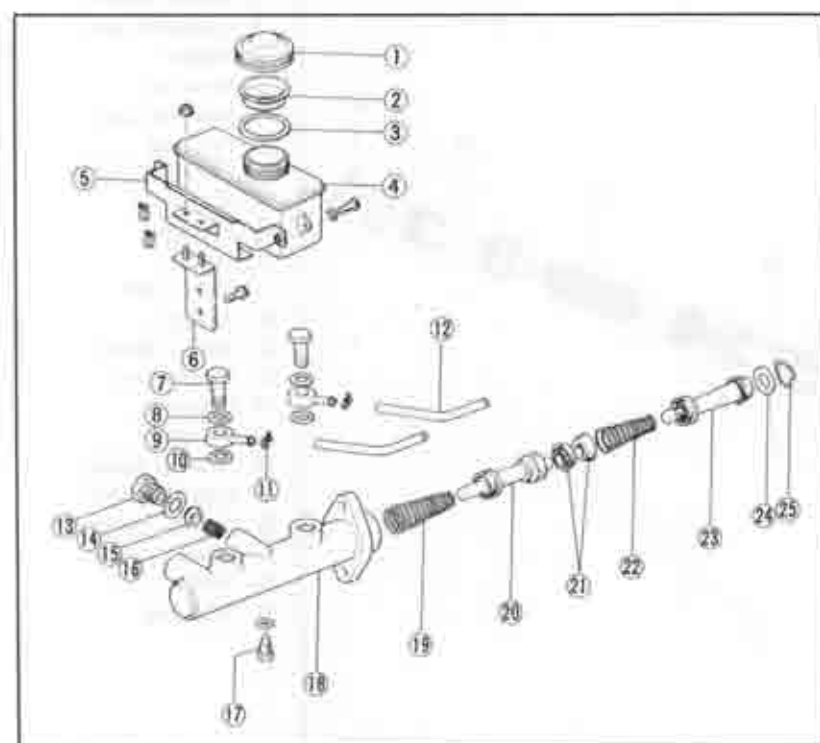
Dual master cylinder components (Left hand drive vehicles)
